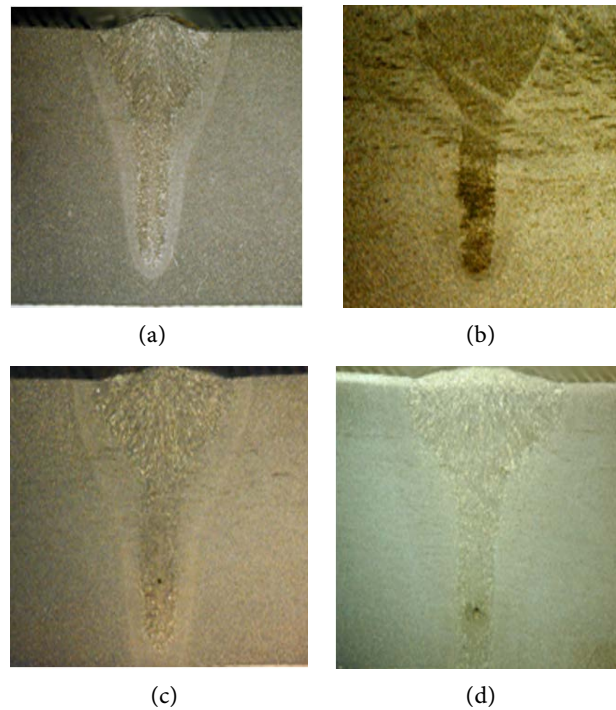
Macrostructure on cross-sections of the bead-on-plate welds produced on 10.0 mm thick plates of JIS G3106 SM570 by laser power of 5 kW, defocusing distance -0.5 mm, shielding gas flow rate of 30 L/min and variable welding speeds of (a) 1 m/min, (b) 0.8 m/min, (c) 0.8 m/min, (d) 0.6 m/min.
